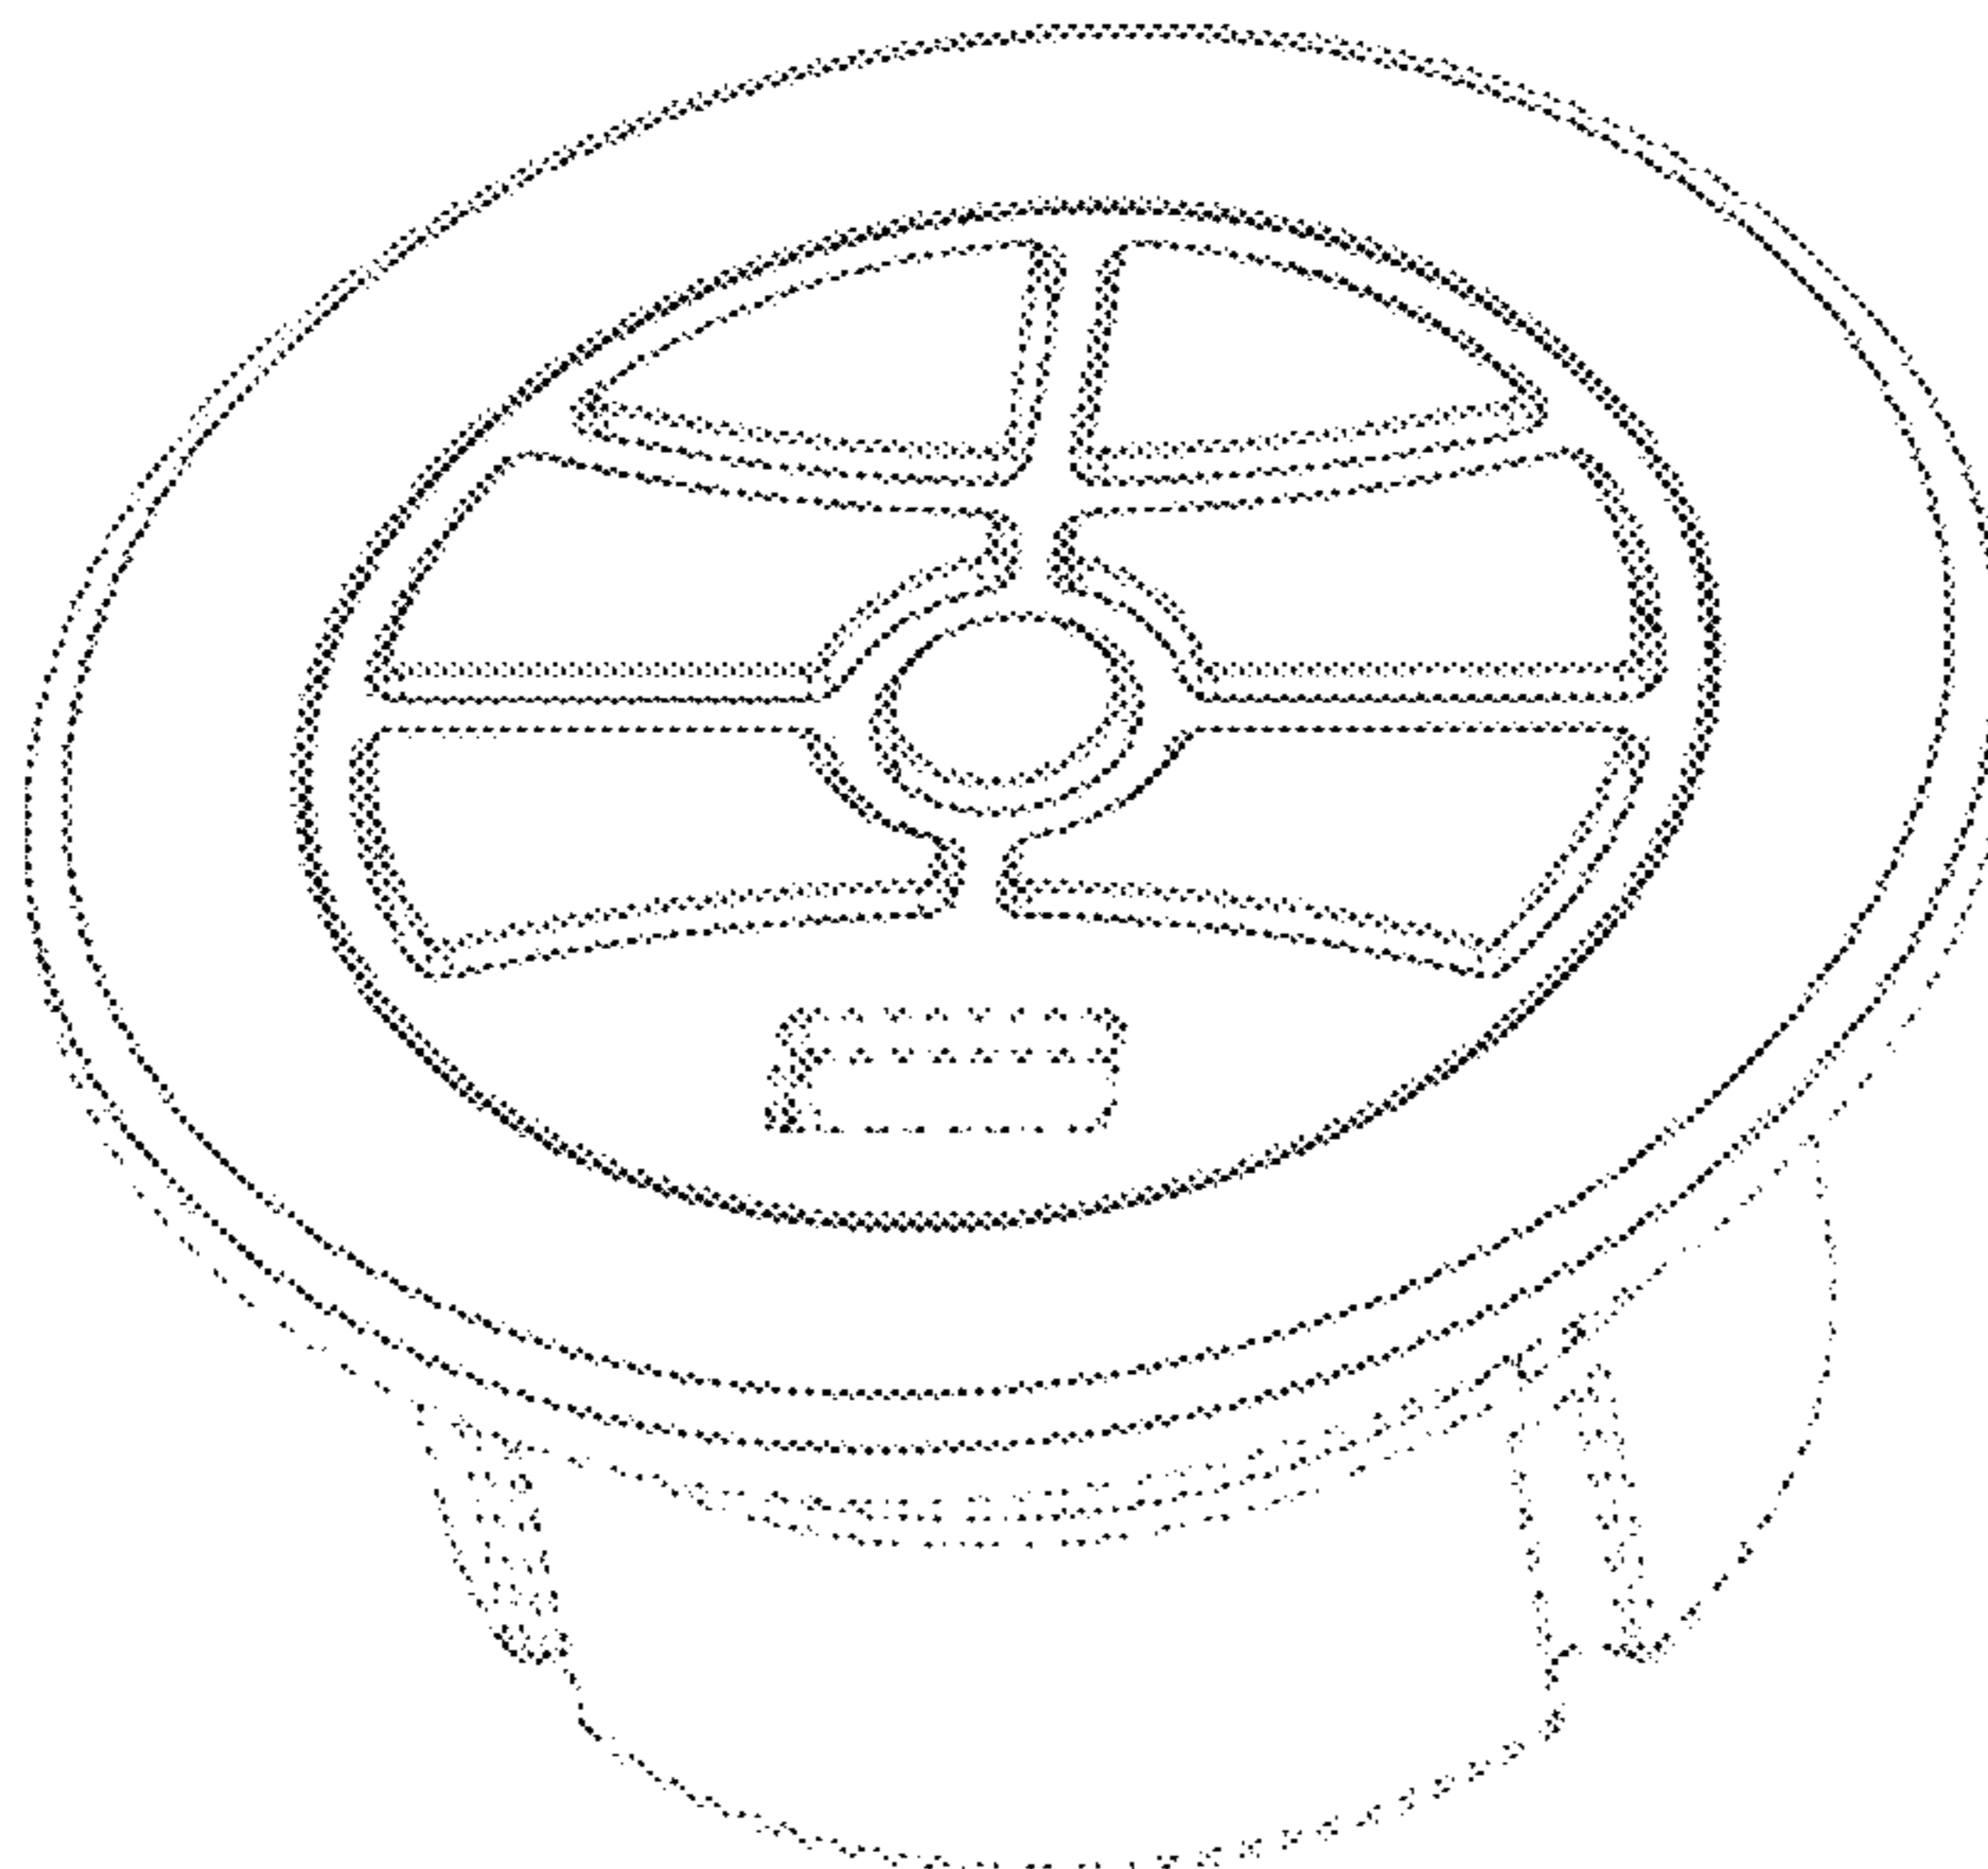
is a front, bottom, right perspective view of a furniture controller, showing our new design;
